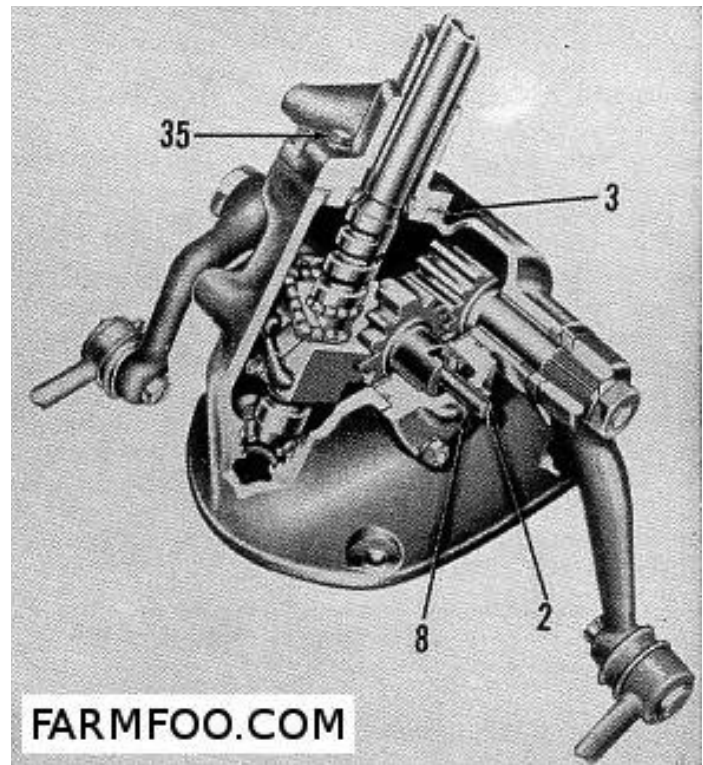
A — Cutaway of latest version of ball nut steering gear used on 8N tractors after serial 216988. The filler plug may be differently located on some 8N tractors in this serial range.
